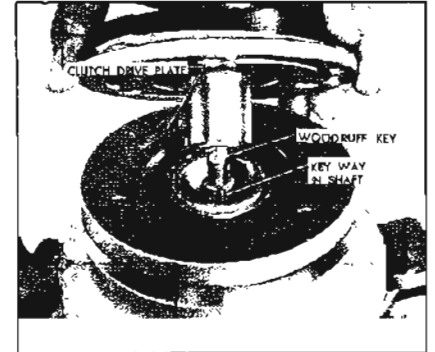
Positioning Clutch Drive Plate on Shaft
